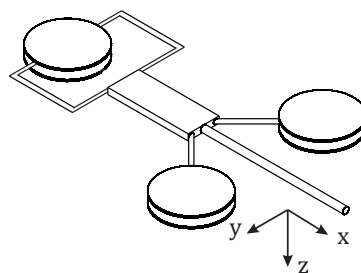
Attachment of the rear rotors with fork-shaped frame.
